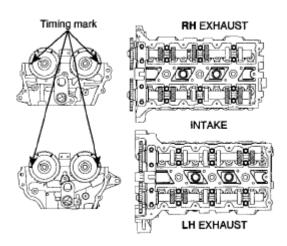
Identifying Mark On Camshaft Sprockets Courtesy of HYUNDAI MOTOR CO.
